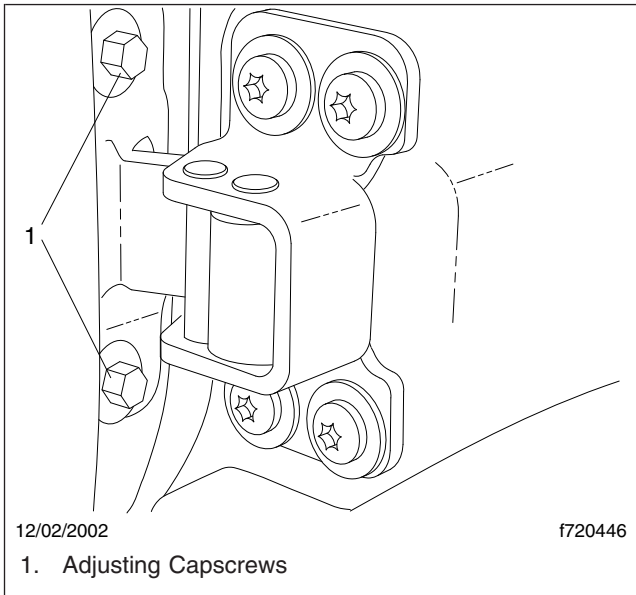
, In-and-Out Adjusting Capscrews on the Door
